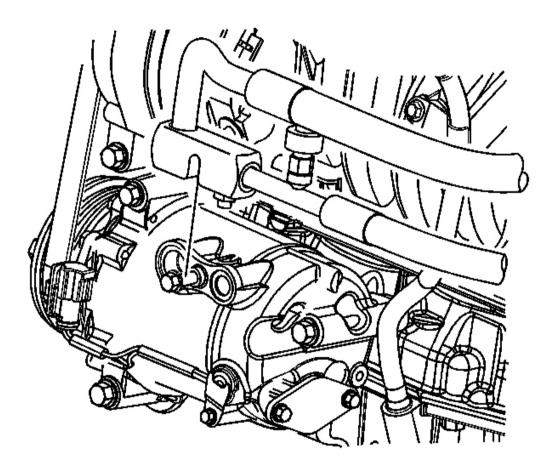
Compressor Bolts & Engine Courtesy of GENERAL MOTORS CORP.
